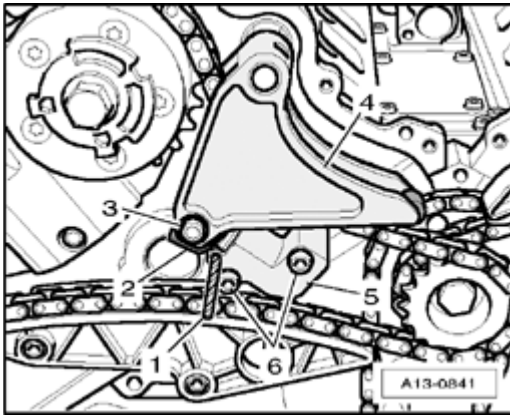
Drill, Guide Piece, Bolts, Chain Tensioner & Tensioning Rail
